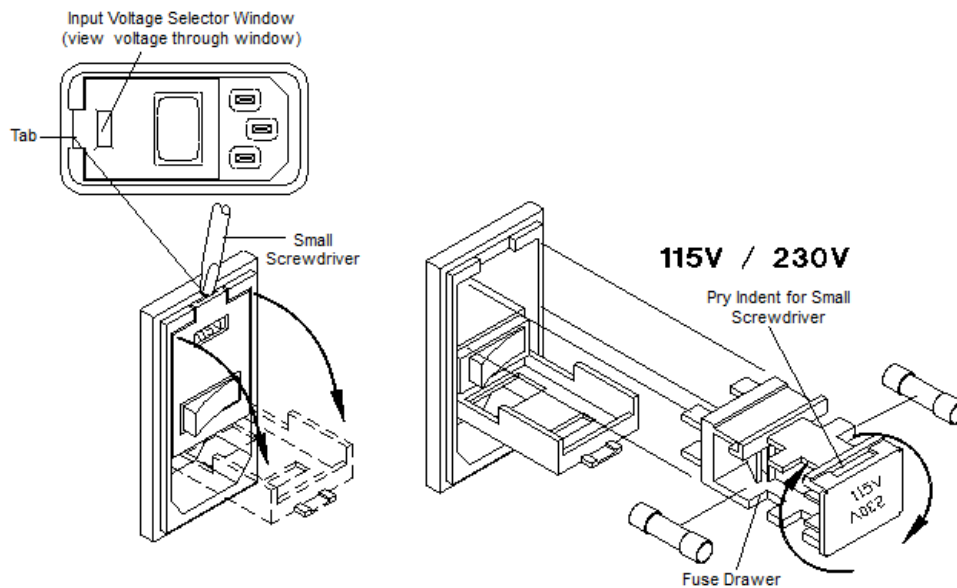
A. Voltage Selector/Fuse Drawer (086xx055)
